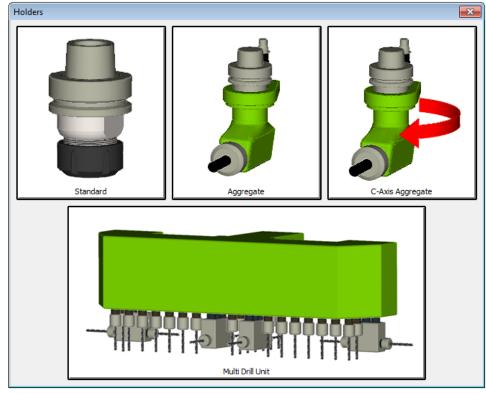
Tool Holder Selection options for Defining New Holder in Router only
